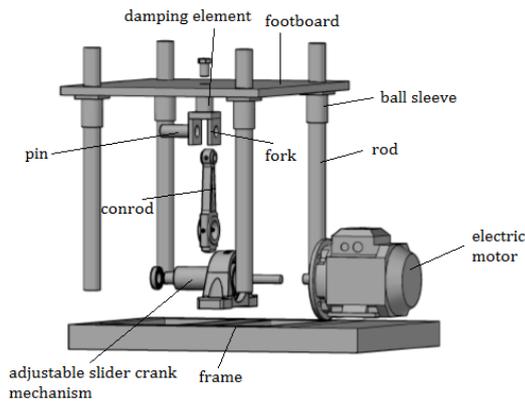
Scheme of the prototype WBV₁. The fork joins the plate by means of a screw and the adjustable crank is coaxial with the connecting rod head.
